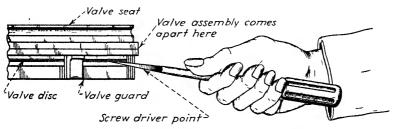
Screw driver opens Pennsylvania valve assembly that is held together by a snap ring.
